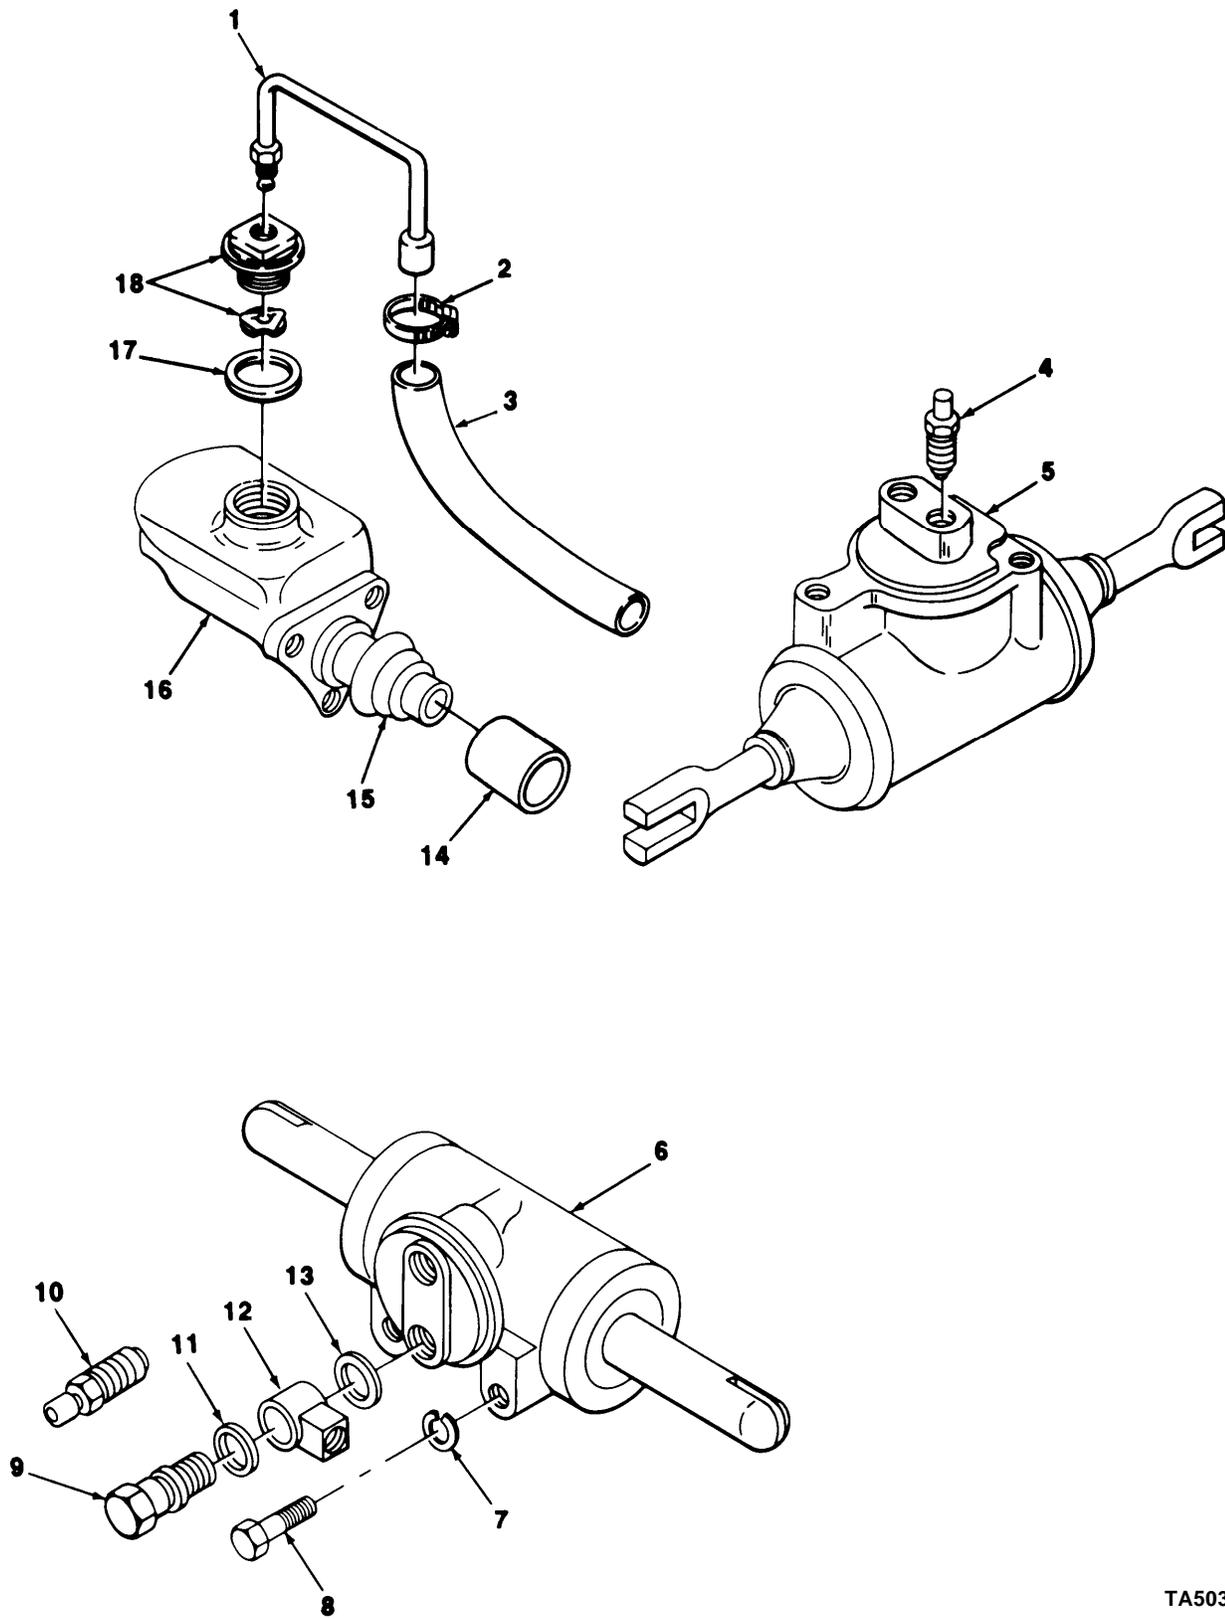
HYDRAULIC MASTER CYLINDER AND WHEEL CYLINDER.
